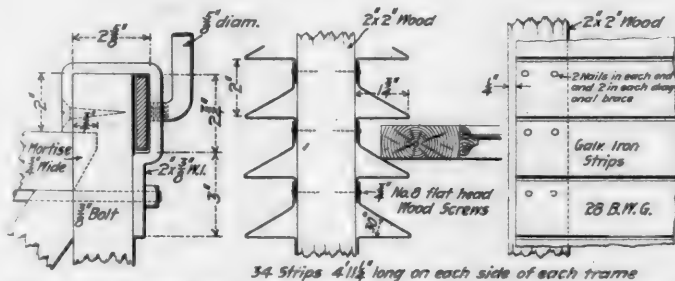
DETAILS OF ARRANGEMENT AND CONSTRUCTION OF THE RACK SYSTEM FOR SUPPORTING FRESHLY VARNISHED DOORS.
